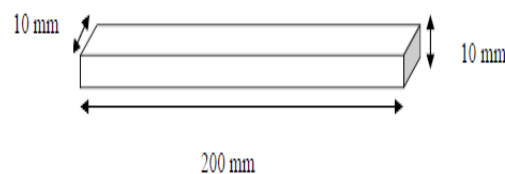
Dimensions of the flexural test specimen in accordance with ASTM D 790-92.
